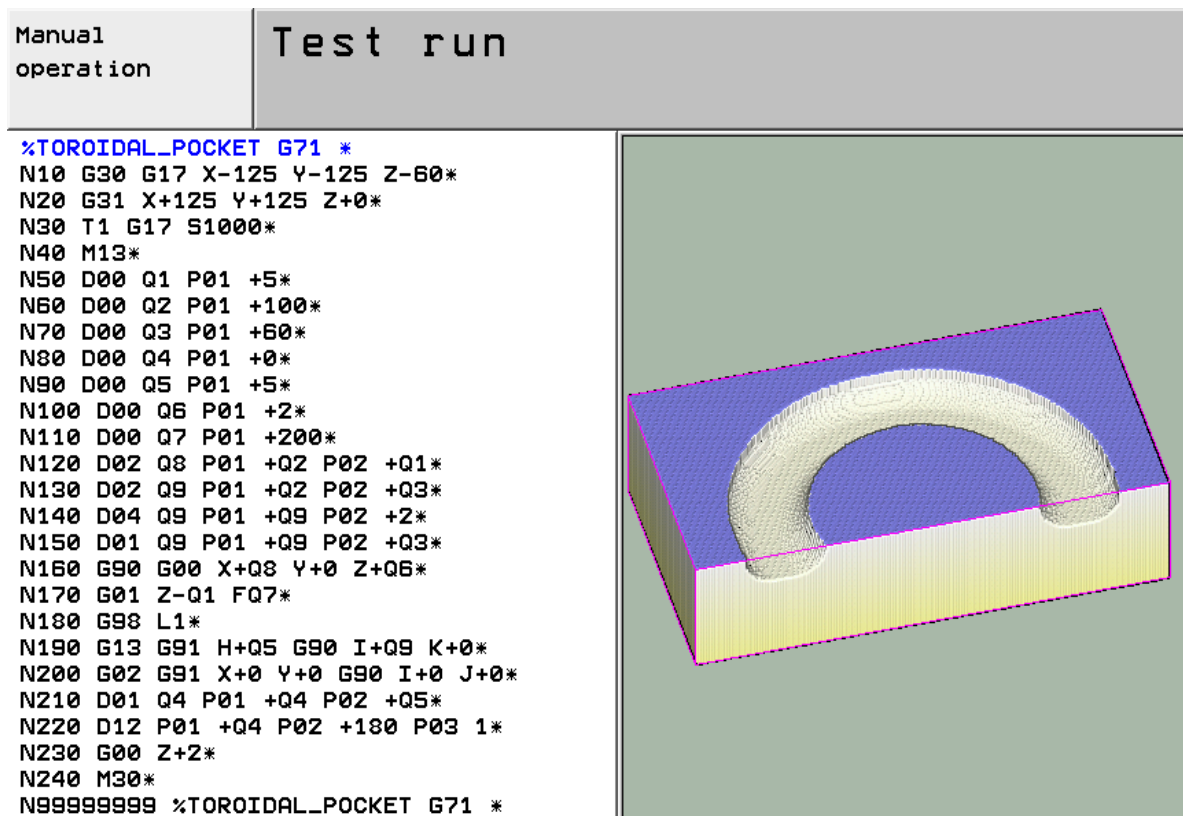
Simulation test for a toroidal pocket - step angle 5° - section view - (Heidenhain control)
